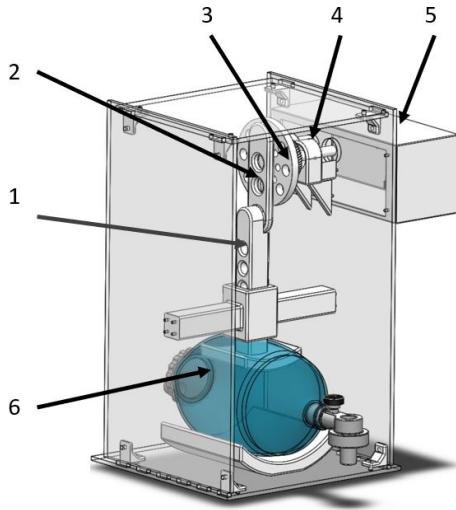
Artificial breathing machine CAD protipe, designed using Dassault Systemes Solidworks®. 1. slider link, 2. connecting rod, 3. crank, 4. gearbox, 5. control box, 6. AMBU.
